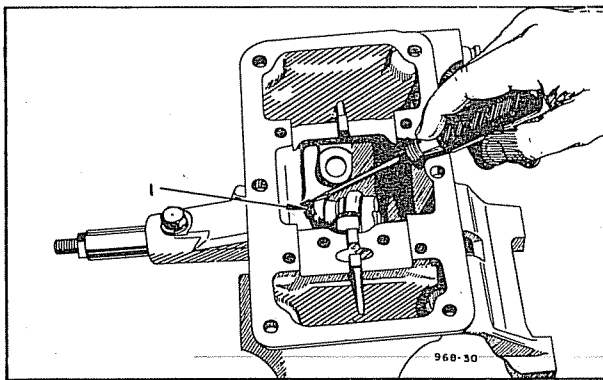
Removing Gearshift Lever Lock Pin Spring.
